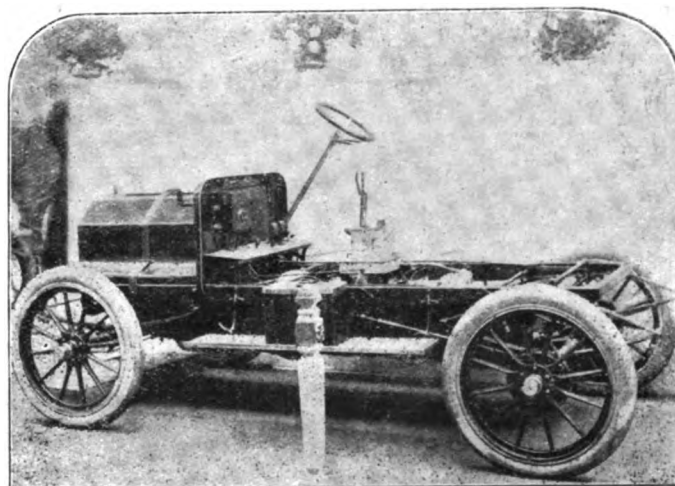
Chassis of Reo 18-22-h.p. Car
